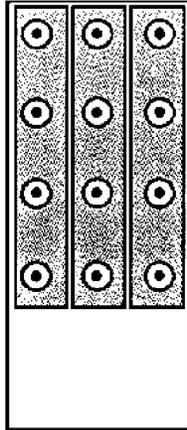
CBR Pistol Pocket Snap Fastener Panel
